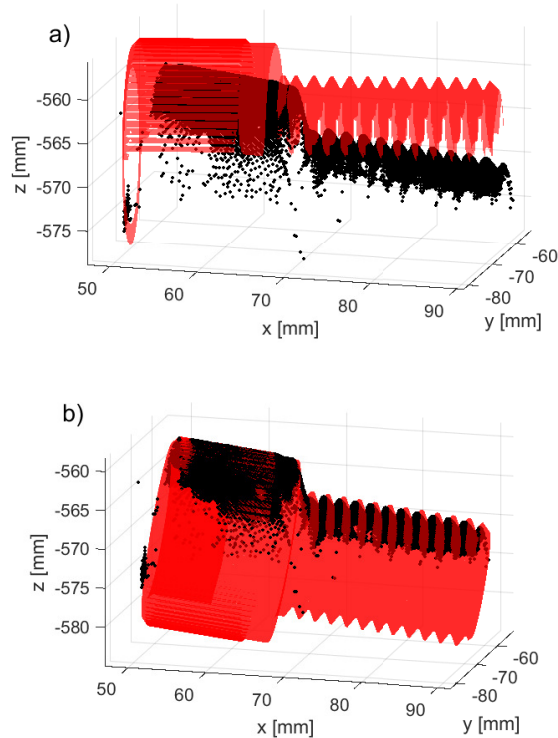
3D point cloud and: a) visible part of CAD surface from Fig. 3; b) full surface of CAD fitted with Method B.
